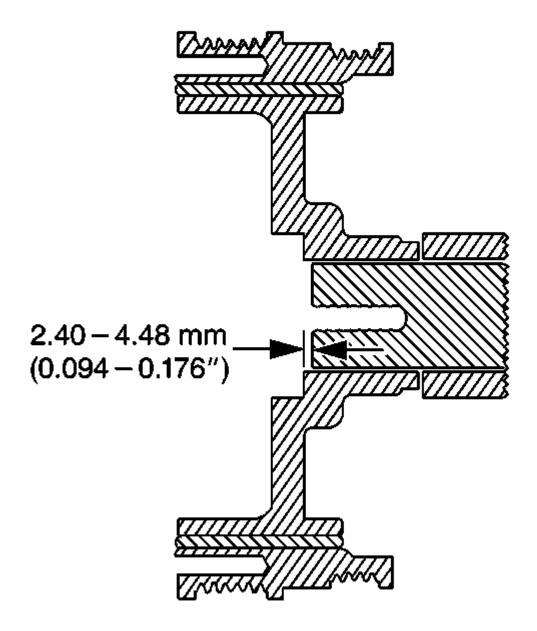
Identifying Hub To Crankshaft Distance Courtesy of GENERAL MOTORS CORP.
